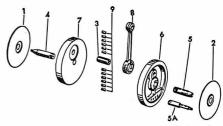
Exploded view of the fly-wheels, crankshaft and rod assembly.
